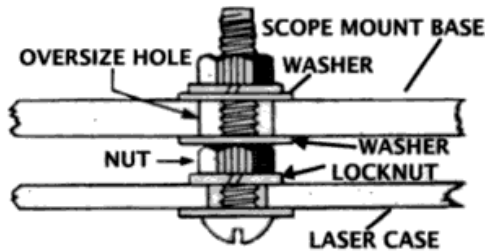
Detail for the receiver mounting plate. An oversized hole-mounting base allows coarse adjustment of the scope assembly. Use an over sized washer on both sides of the hold, and a lock washer at the laser's case.
